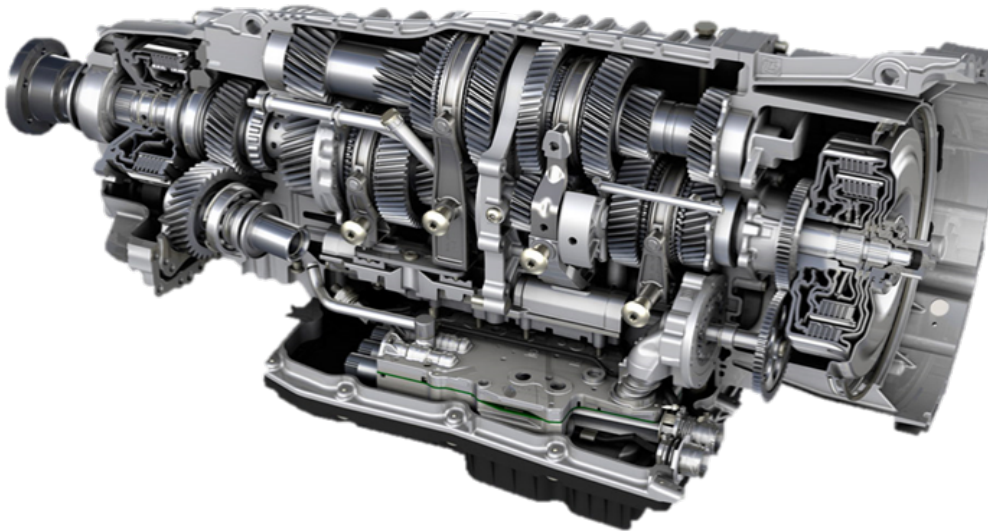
A section view of a DCT system for passenger cars [3].
